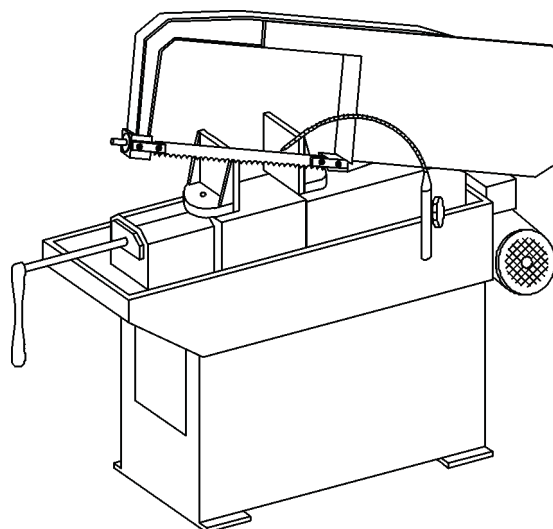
Hack-sawing machines — Horizontal-pivot type
